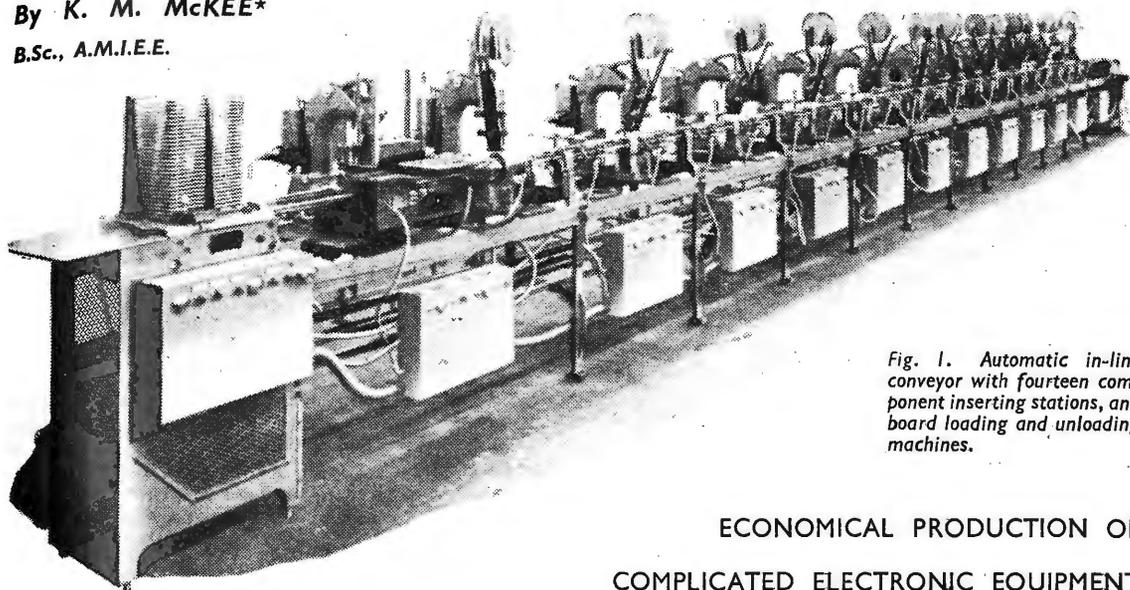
Automatic in-line conveyor with fourteen component inserting stations, and board loading and unloading machines.
